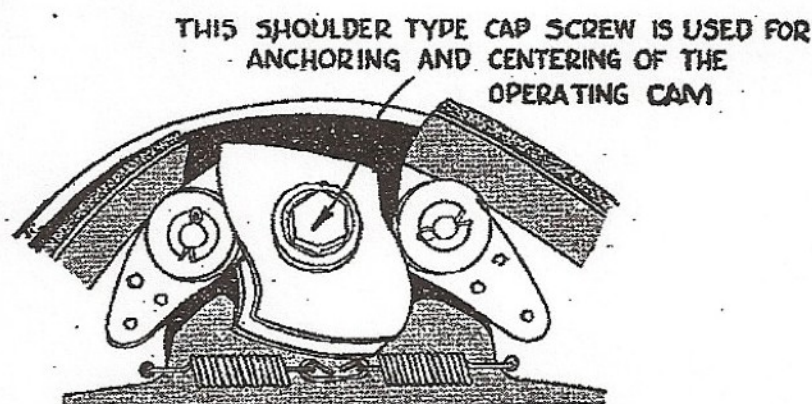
Adjustable cam assembly as used on some Bendix installations
